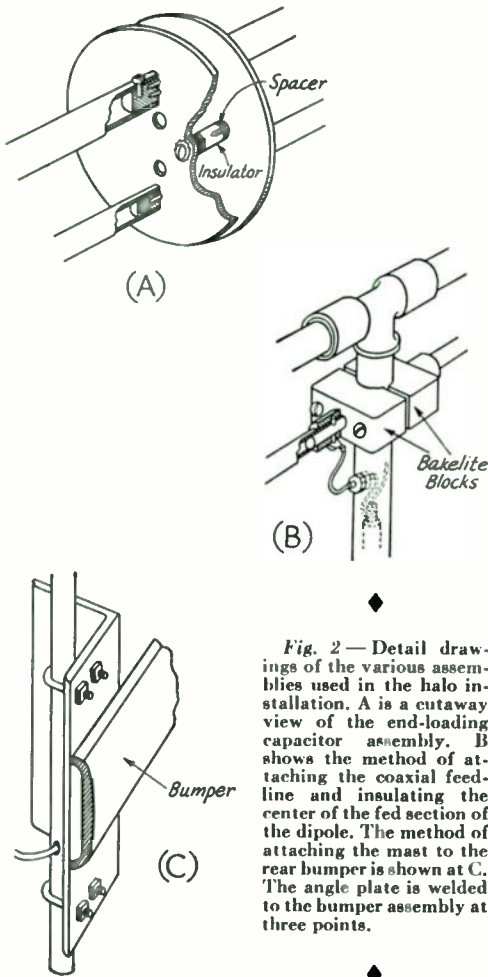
Detail drawings of the various assemblies used in the halo installation. A is a cutaway view of the end-loading capacitor assembly. B shows the method of attaching the coaxial feedline and insulating the center of the dipole section of the antenna. The method of attaching the mast to the rear bumper is shown at C. The angle plate is welded to the bumper assembly at three points.
